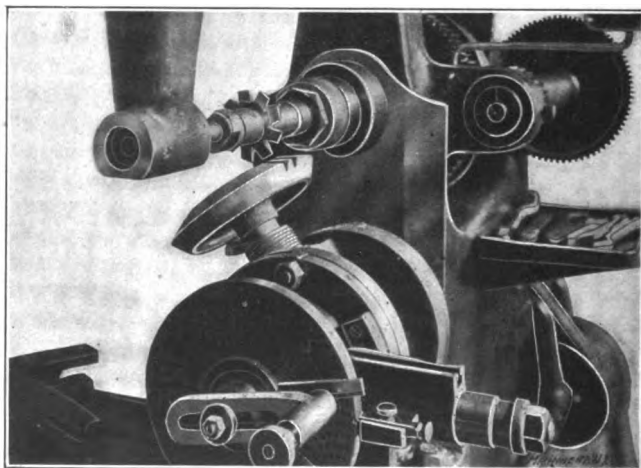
Trial Tooth Formed by Two Trial Cuts.
